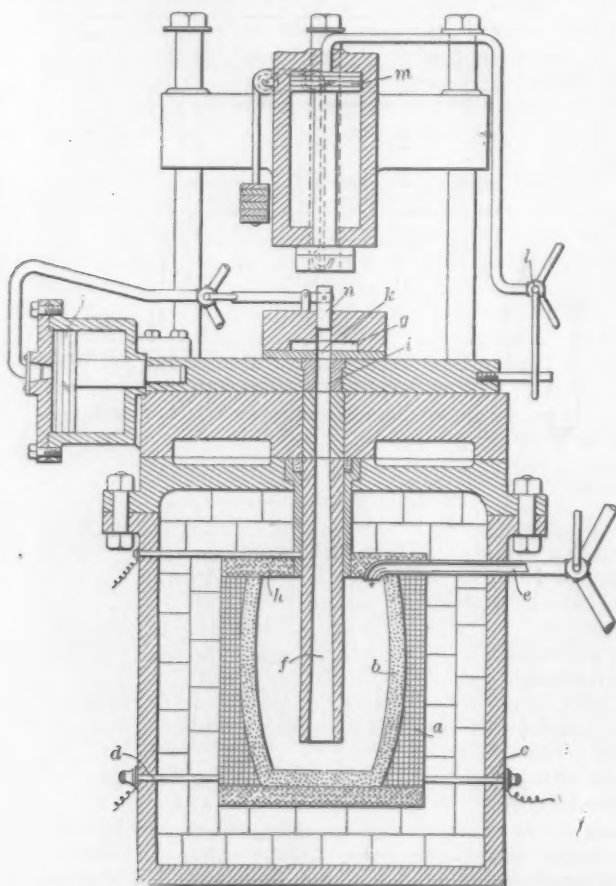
A Modern Pneumatic Die-Casting Machine in Which the Metal Is Kept Melted by Electricity.
